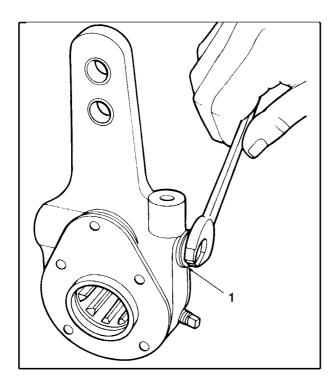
Manual Slack Adjuster Locking Sleeve on Adjusting Nut
